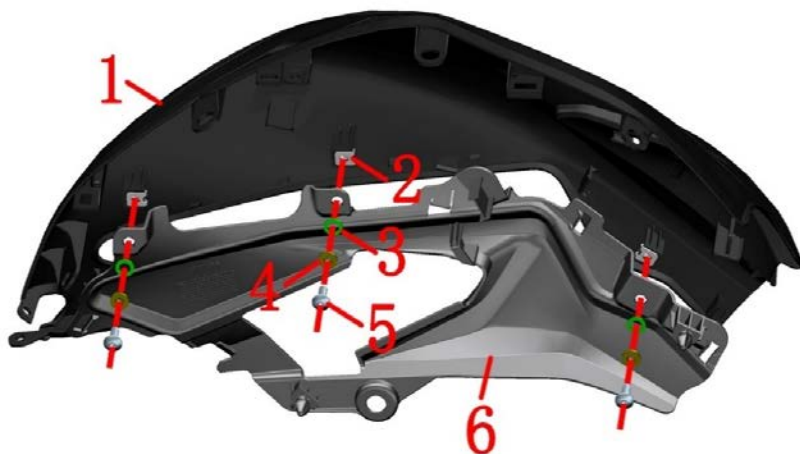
Fuel Tank Assembly		Fuel Tank Assembly2	CHK	CAUTION
